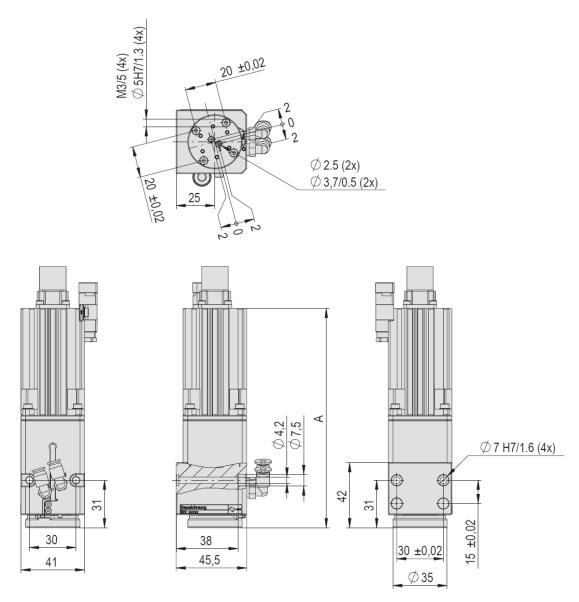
Dimensional drawing rotational axis RA-40-2F
